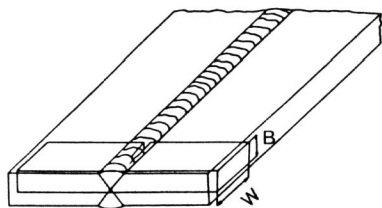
Obtainment of specimen for testing weld metal
